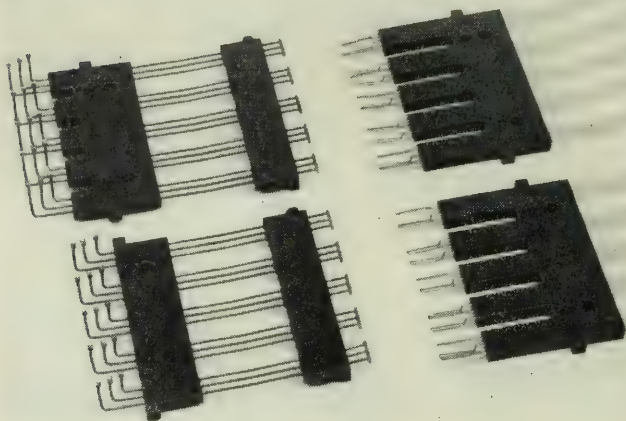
Molded wire assemblies for a 30-contact relay.
